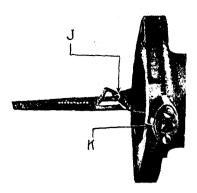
Adjusting Carburetor Automatic Throttle with Tool 76037
